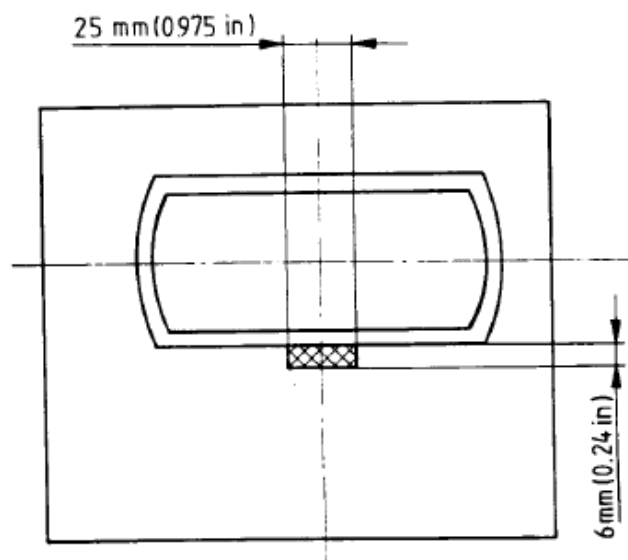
Bottom view of bottom corner fitting showing contact area (shaded) for mis-gather (push-up) load
